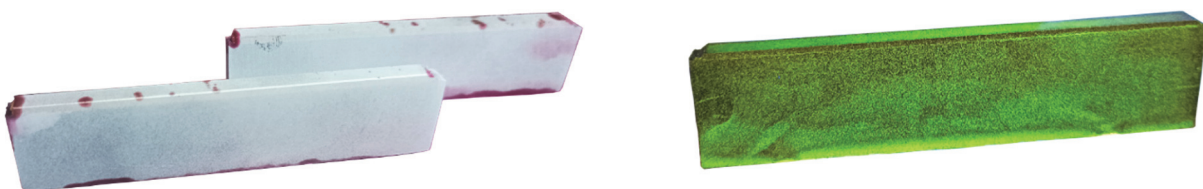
Example of the non-destructive detection of the open surface cracks and non-solids in the aluminium bronze/S960 samples; (a) Dye Penetrant Crack test with indicated surface defects; (b) Magnetic Particle inspection
